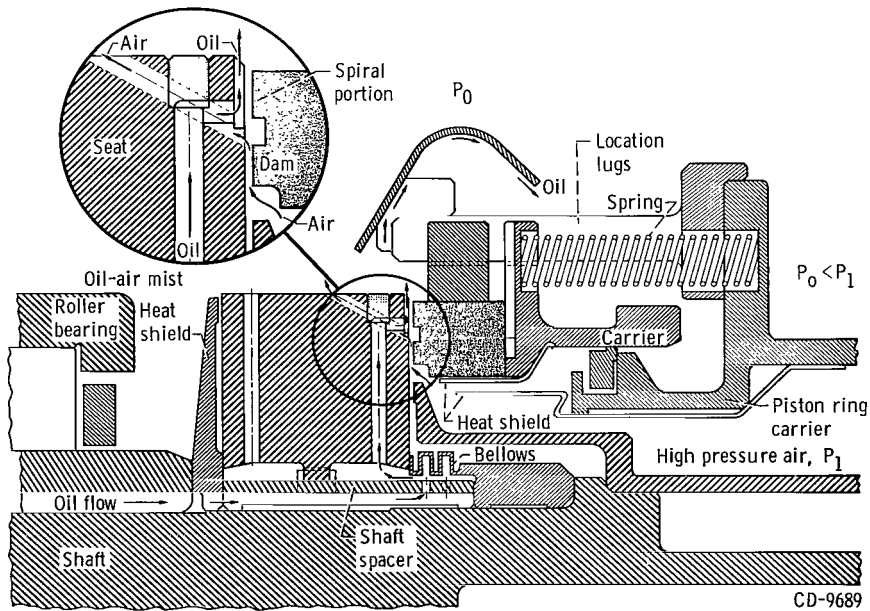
Face contact seal with spiral groove bearing for lift augmentation.
